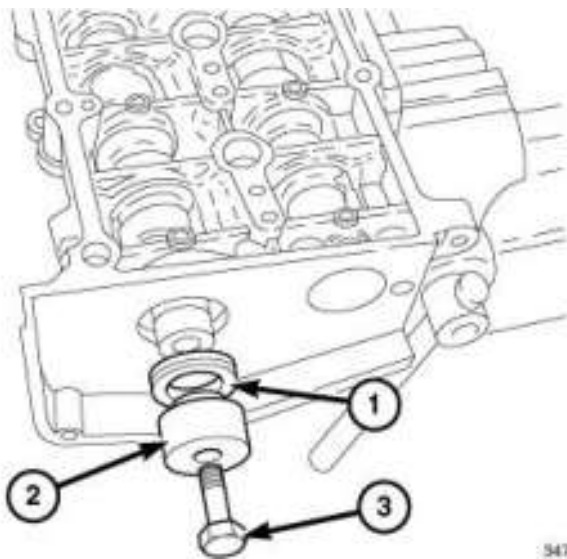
Camshaft Oil Seal, Fitting Tool & Bolt
